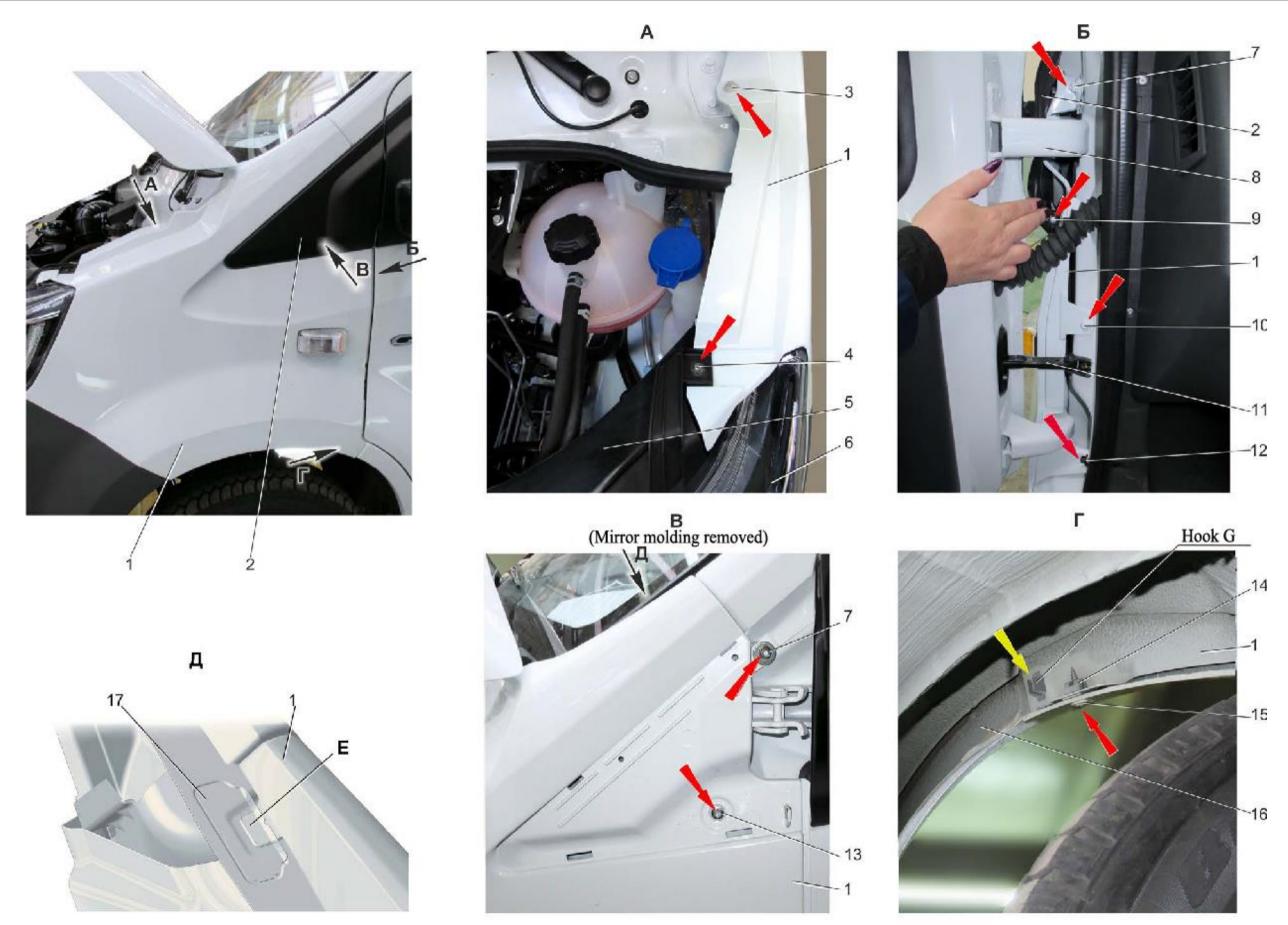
Front fender installation: 1 – front fender; 2 – mirror molding; 3,7,10 – bolts; 4,9,15 – screws; 5 – frontend; 6 – headlight; 8 – hinge; 11 – door stop; 12,13 – nuts; 14 – spring holder; 16 – floor niche; 17 – front strut extension plate
